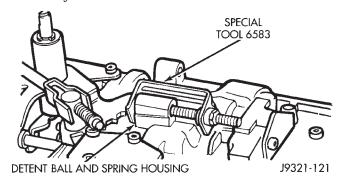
Securing Detent Ball And Spring With Retainer Tool
